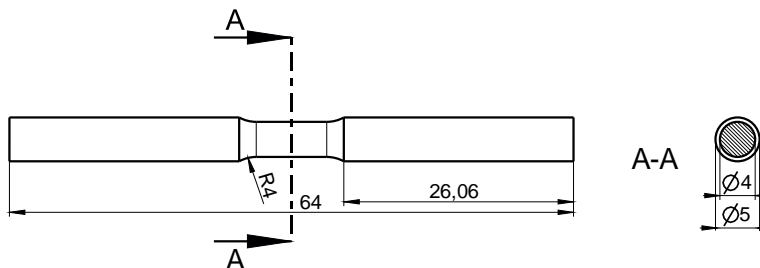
tensile specimen geometry testing area 8 mm long and 4 mm diameter, all dimensions in mm
